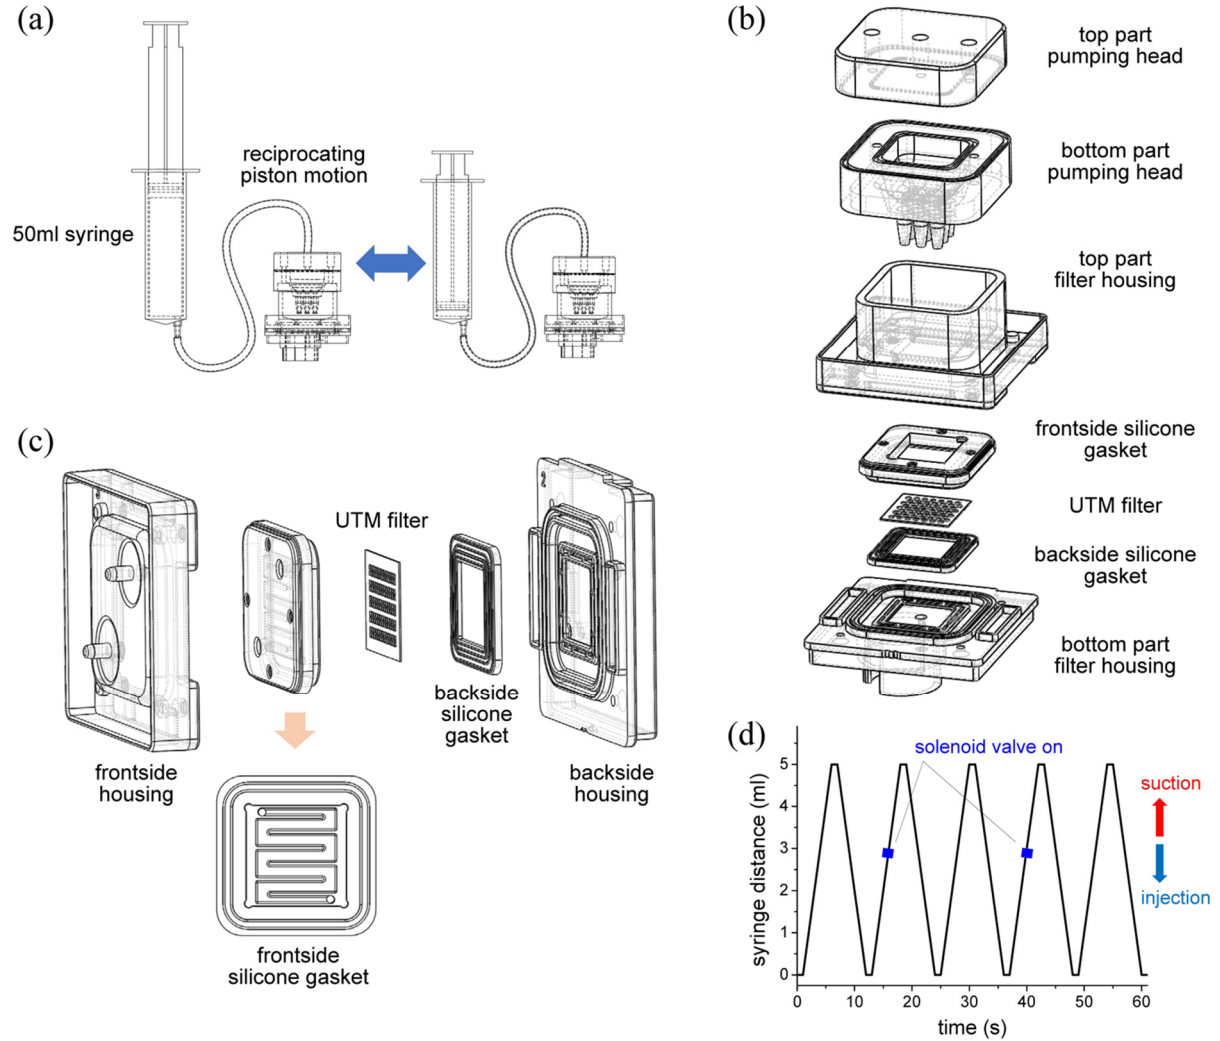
Details on the filtering system and housing design: (a) reciprocating motion of the pumping head filtration with backflush (PHF) unit of the filtration system, (b) housing assembly drawing of PHF, (c) housing assembly drawing of tangential flow filtration, (d) syringe distance as a function of time during suction and injection.
